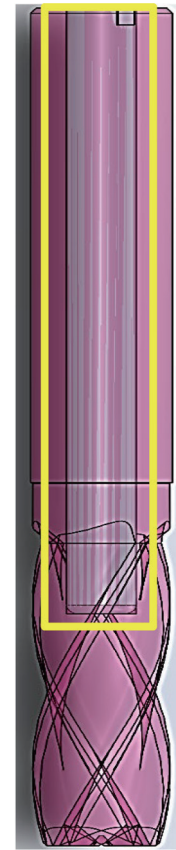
(Color online) Intelligent sensing milling cutter mechanism.
